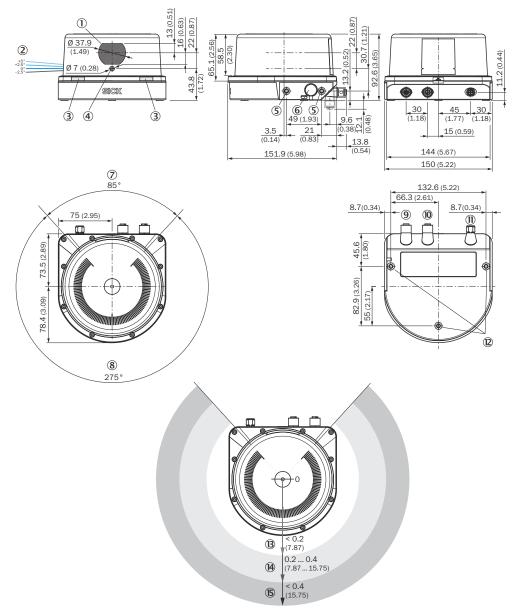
MRS1000 device structure and dimensions, dimensions in mm
